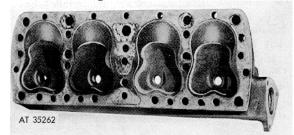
Aluminum cylinder head showing corrosion damage.
